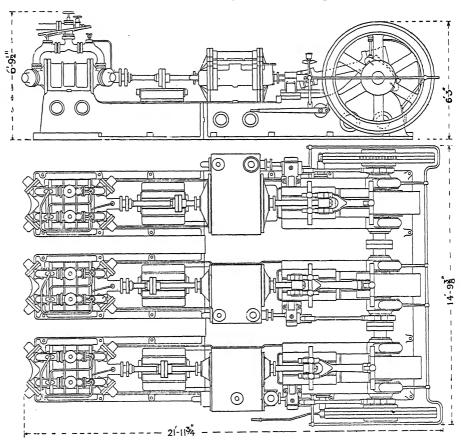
General Arrangement of 12½ in. X 21 in. Triplex Ammonia Compressor
